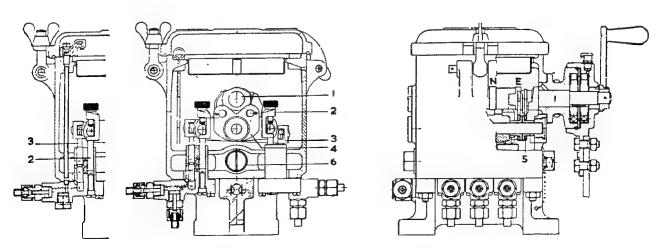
Sectional drawing of the Type F.S.A. Lubricator. LH drawing shows method of converting pumping units to single feeds instead of double ones.
